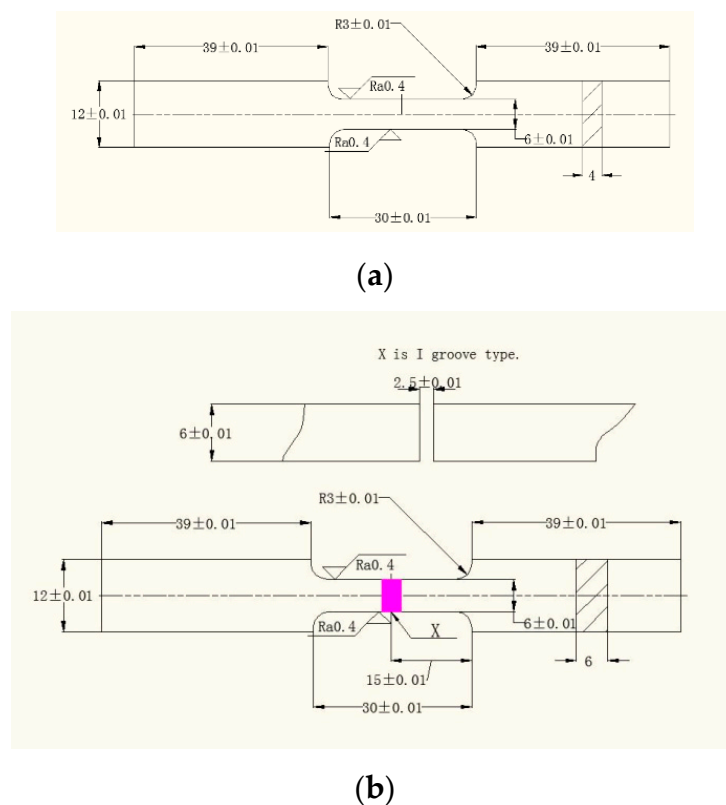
Specimen geometry dimension: (a) base metal; (b) weldment; (all dimensions in mm, roughness in micro meters).
